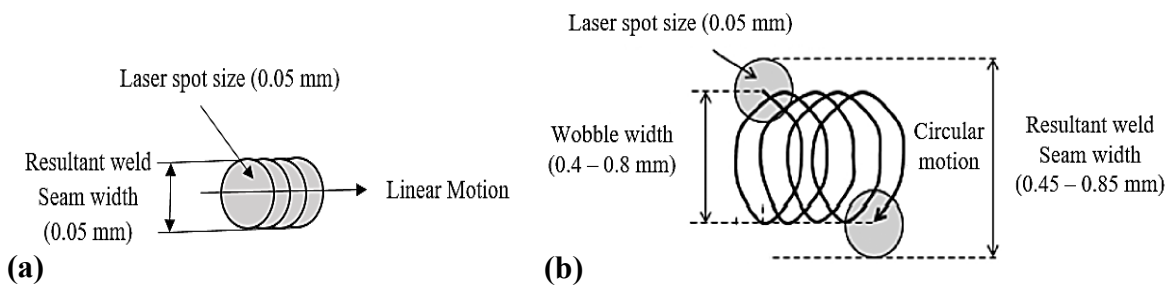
Schematic diagram of (a) contour laser welding, and (b) wobble laser welding
